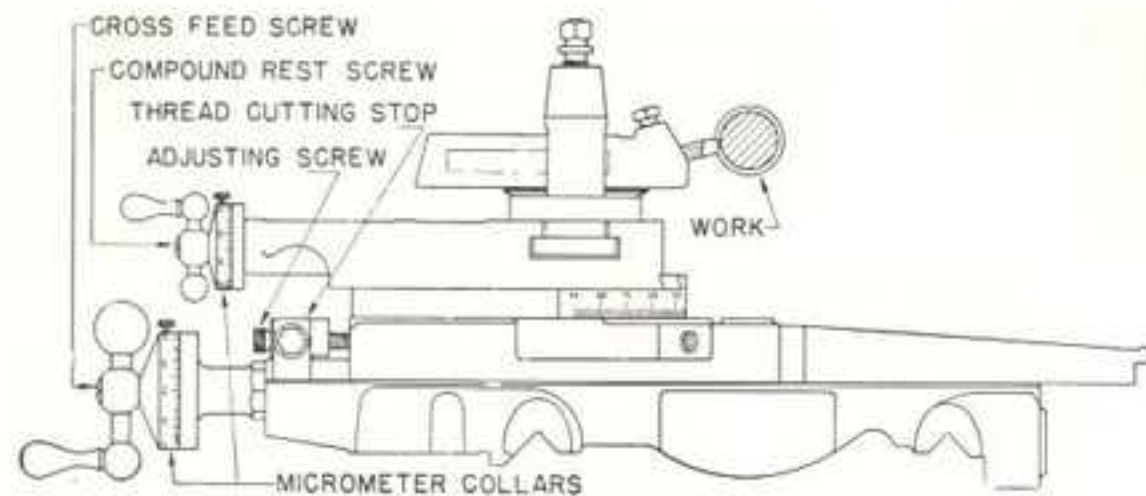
Thread Cutting Stop Attached to Dovetail of Saddle
